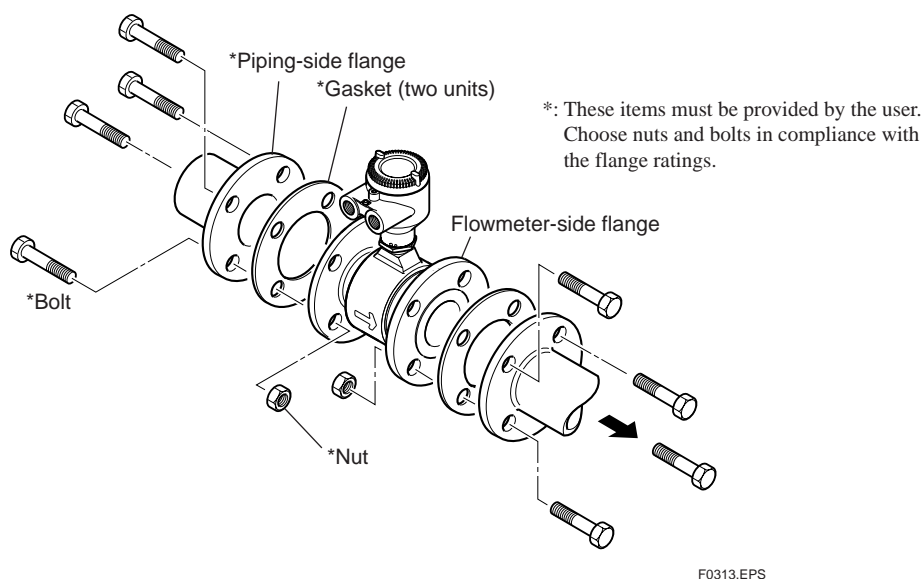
Mounting Procedure for Flange Type (size: 2.5 mm (0.1 in.) to 400 mm (16 in.))
